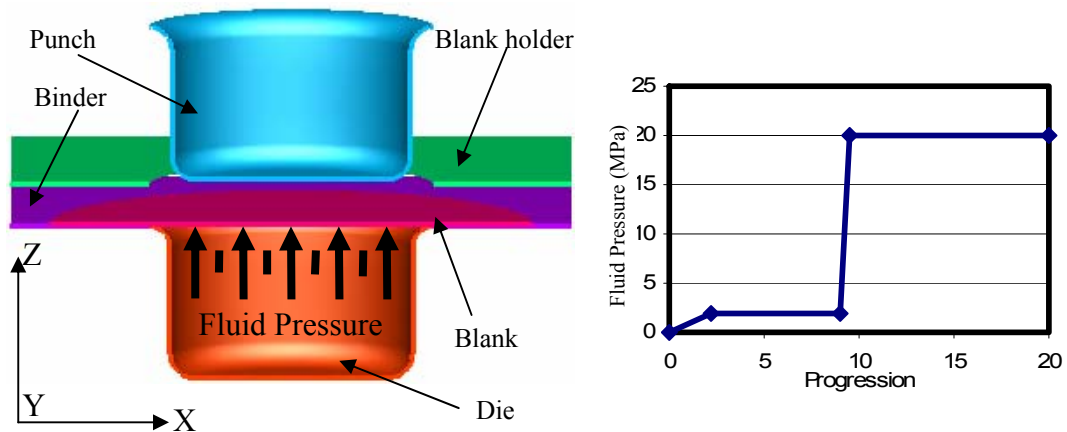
Hydro-mechanical deep drawing (aquadrawing) process setup and counter pressure exerted by fluid on to the workpiece
